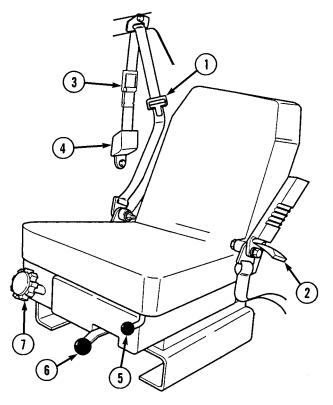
Operator and Crew Three-Point Seatbelt/Seat Adjustment.
